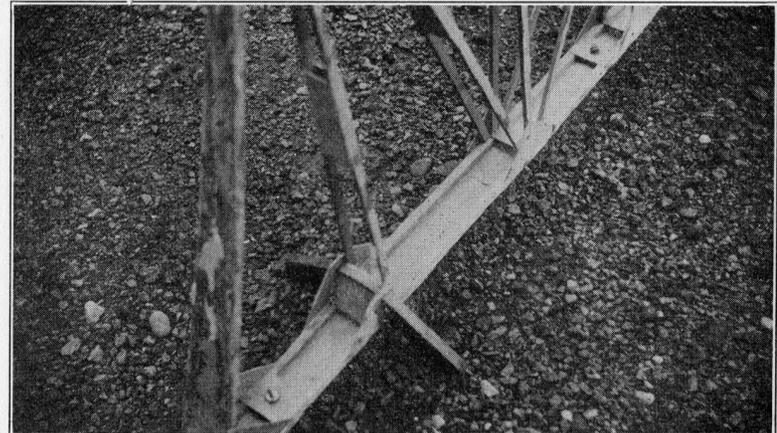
Plate XXXI. Detail of Prüfling Rudder Showing Control-Horn Attachment
